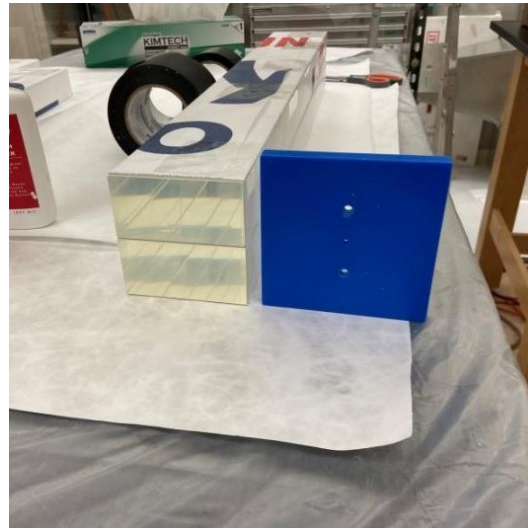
Drilling mold aligned with the bar to be drilled.
